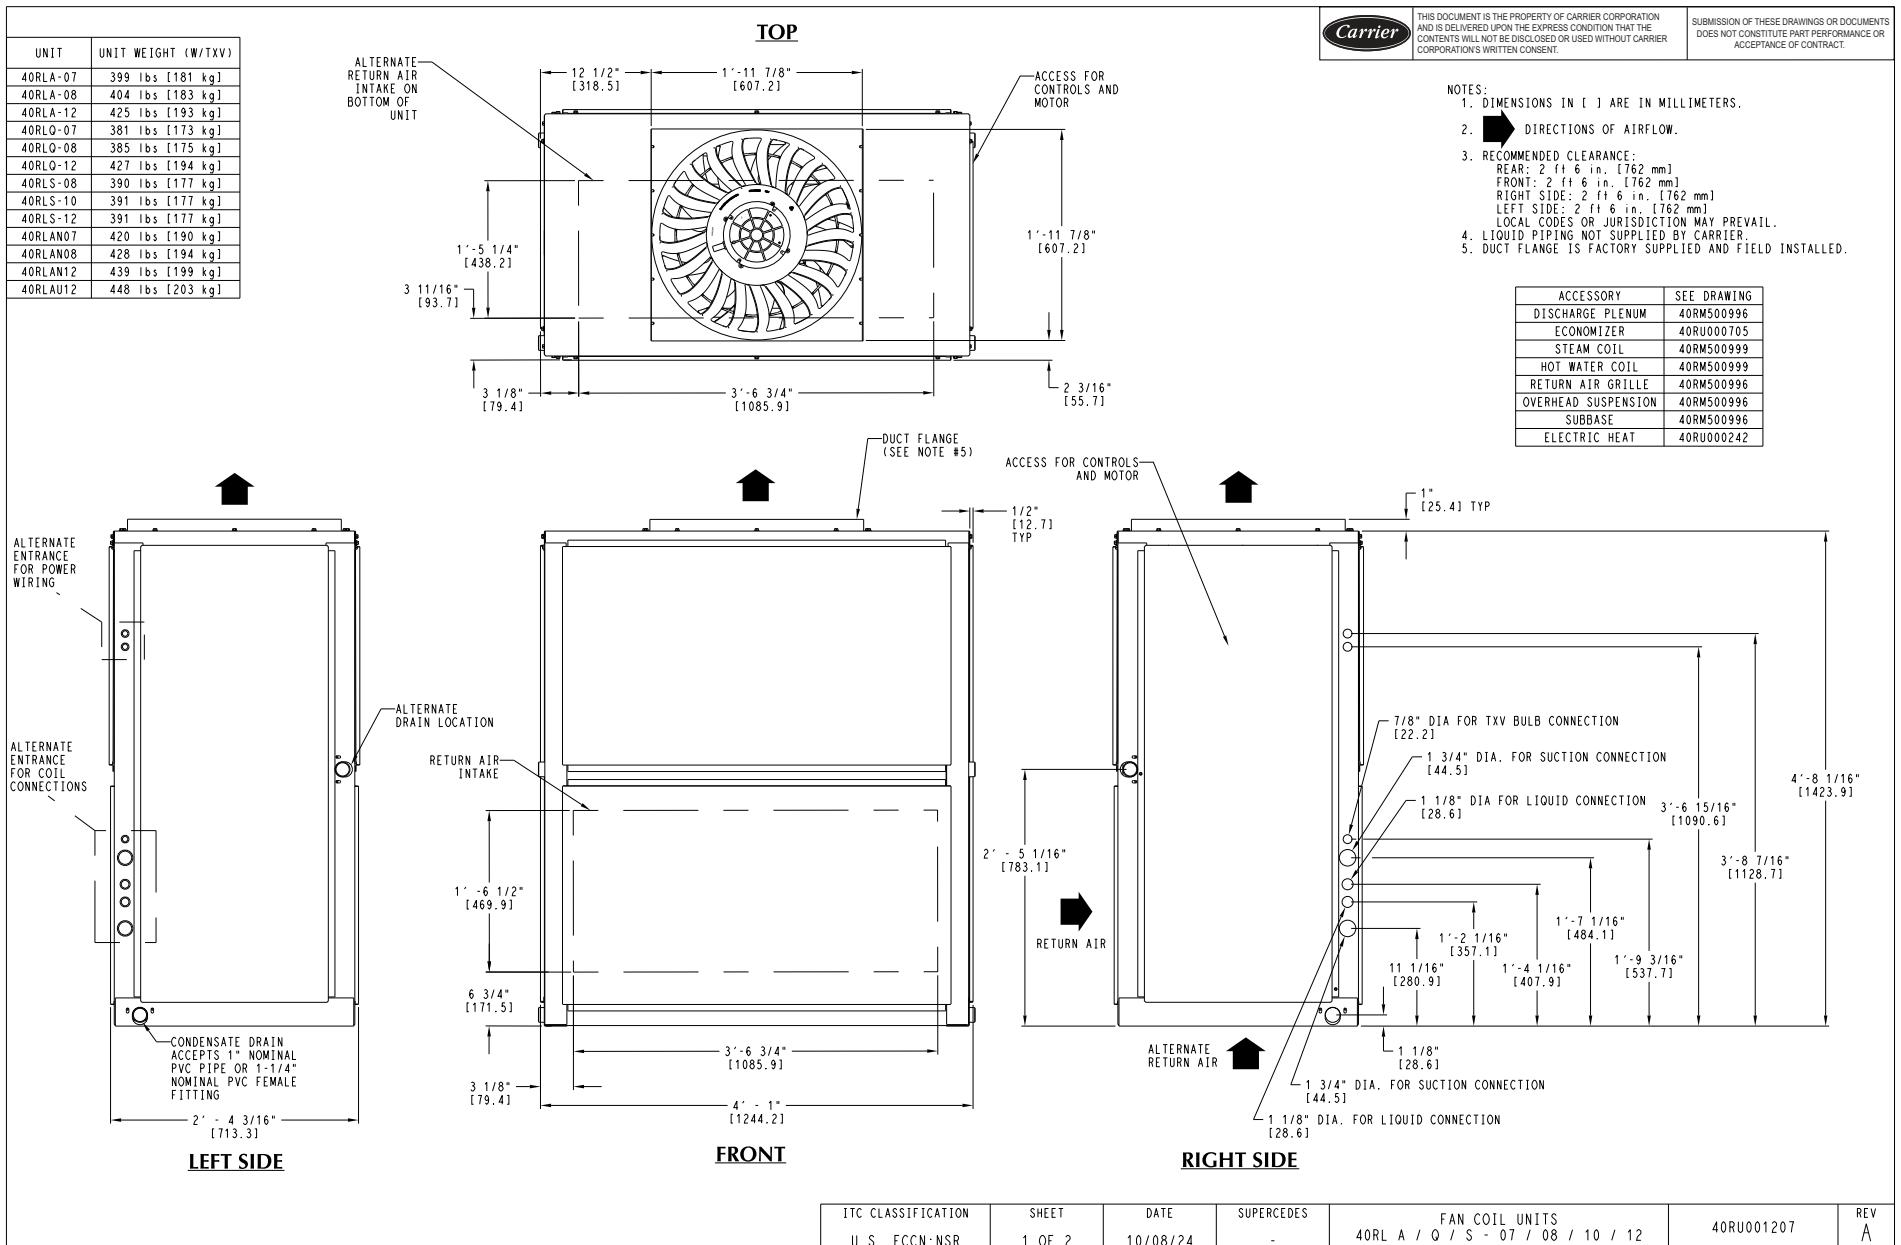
40RL 07-12 Base Unit Dimensions
